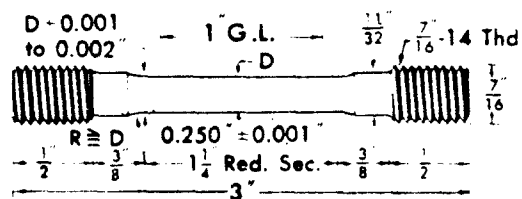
Longitudinal Tensile Specimen Geometry.
